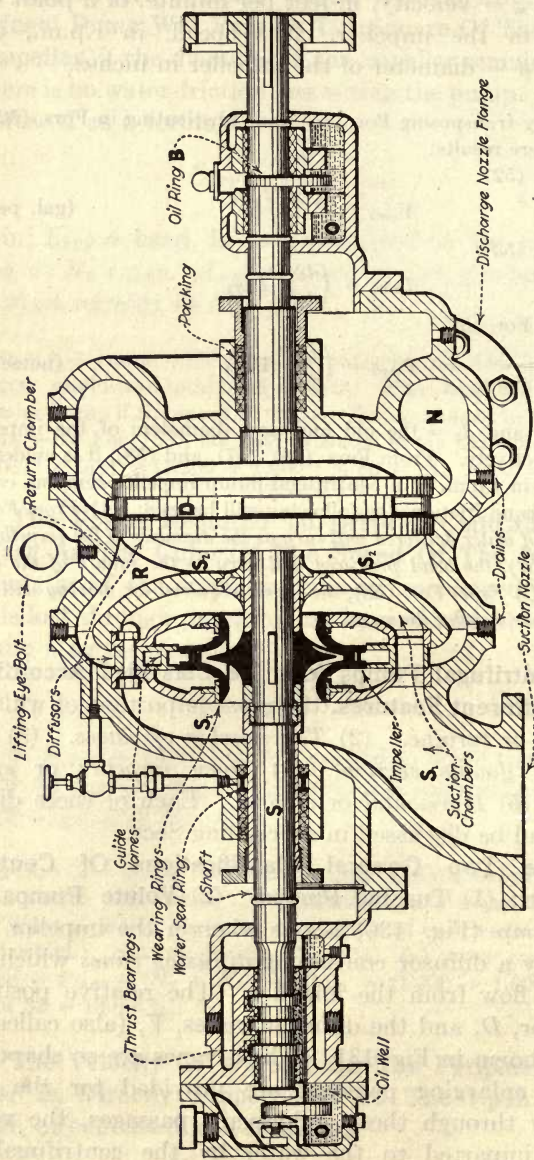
Sectional View Of Two-Stage, Double-Suction Turbine Pump. (Worthington Pump & Machinery Corporation.)
